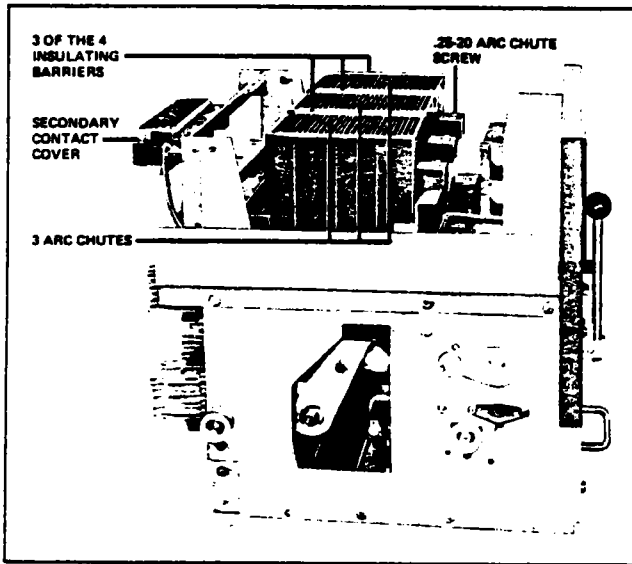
Breaker with Barrier Removed to Show Mounting of Arc Chutes (391072)
